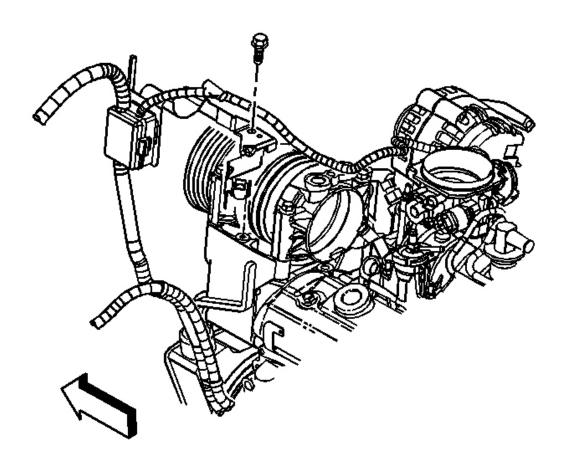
View Of Junction Block Bracket Bolts Courtesy of GENERAL MOTORS CORP.
